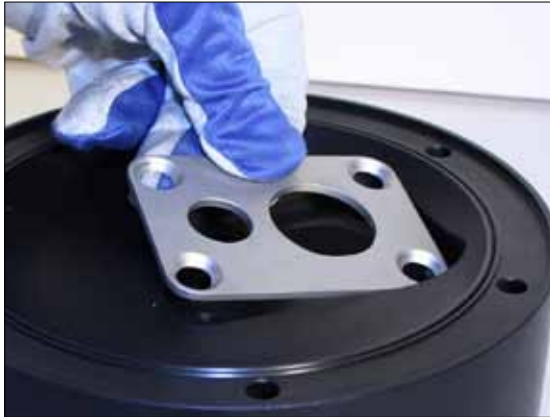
Carefully mount the piston and shaft by hand. Repeat steps Fig 6.3 and Fig 6.4 on the remaining side. Carefully secure the endcaps equally on both sides.
